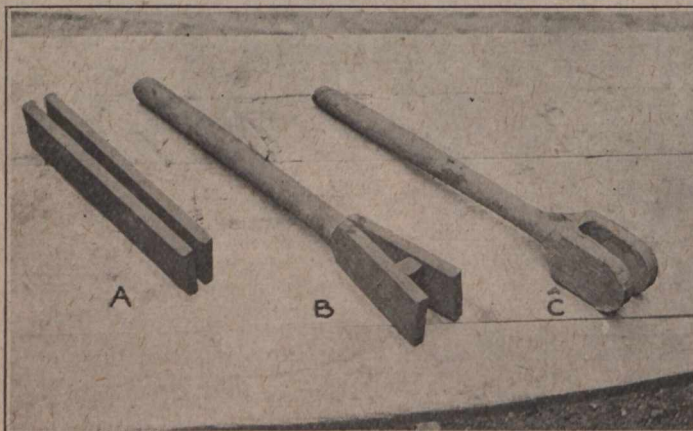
Boiler Stay End Produced on the Forging Machine.
